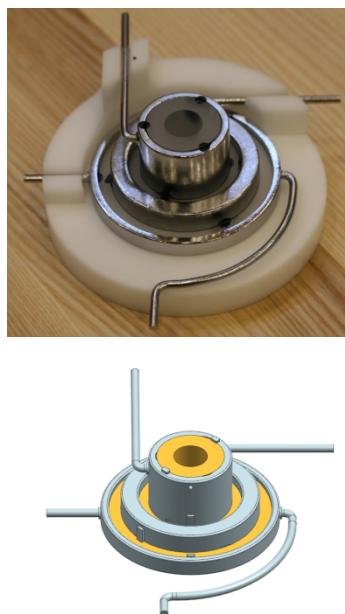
Original Filter Assembly attached with Styrofoam (above) and new concept (below)
